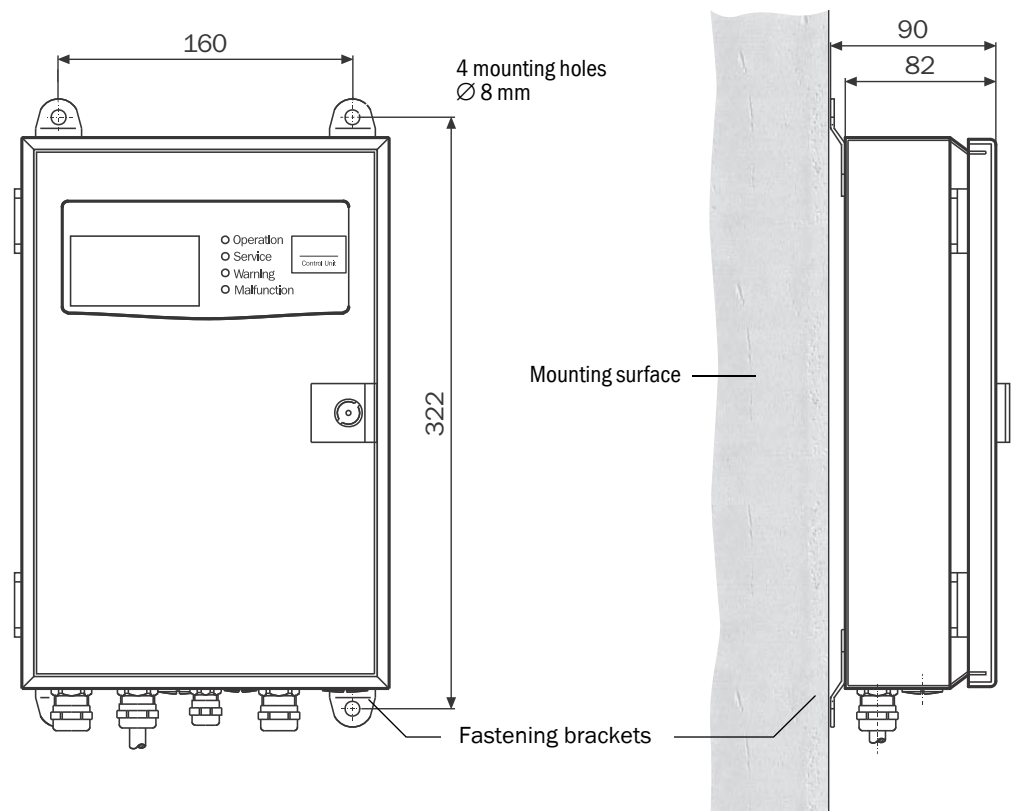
Installing the evaluation unit (sheet metal enclosure version)
